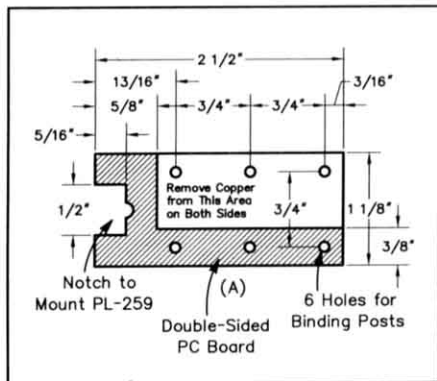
Physical layout of the Gadget; dimensions are not critical. Remove a “lazy-L” area of foil from both sides of a piece of double-sided PC board. A 1/2-inch-wide notch at one end of the board accepts the PL-259 shell, which is soldered to the foil on both sides of the board. Six holes accept the binding posts (Radio Shack #274-661).
